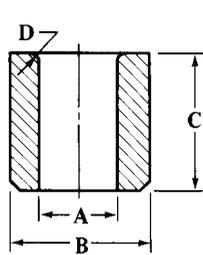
Headless Type Press Fit Wearing Bushings — Type P
